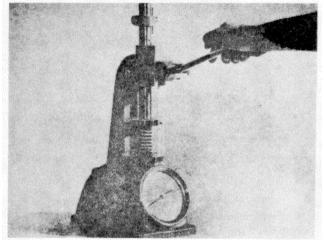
H-5. Testing Injector Spring on 3375182 Tool
